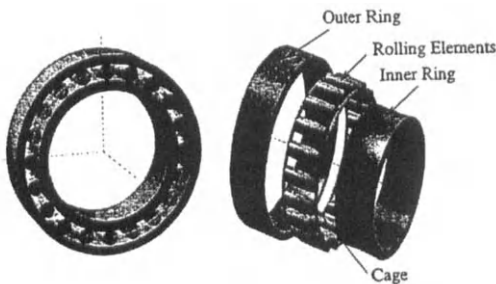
A Compact Aligning Roller Bearing (CARB™)
